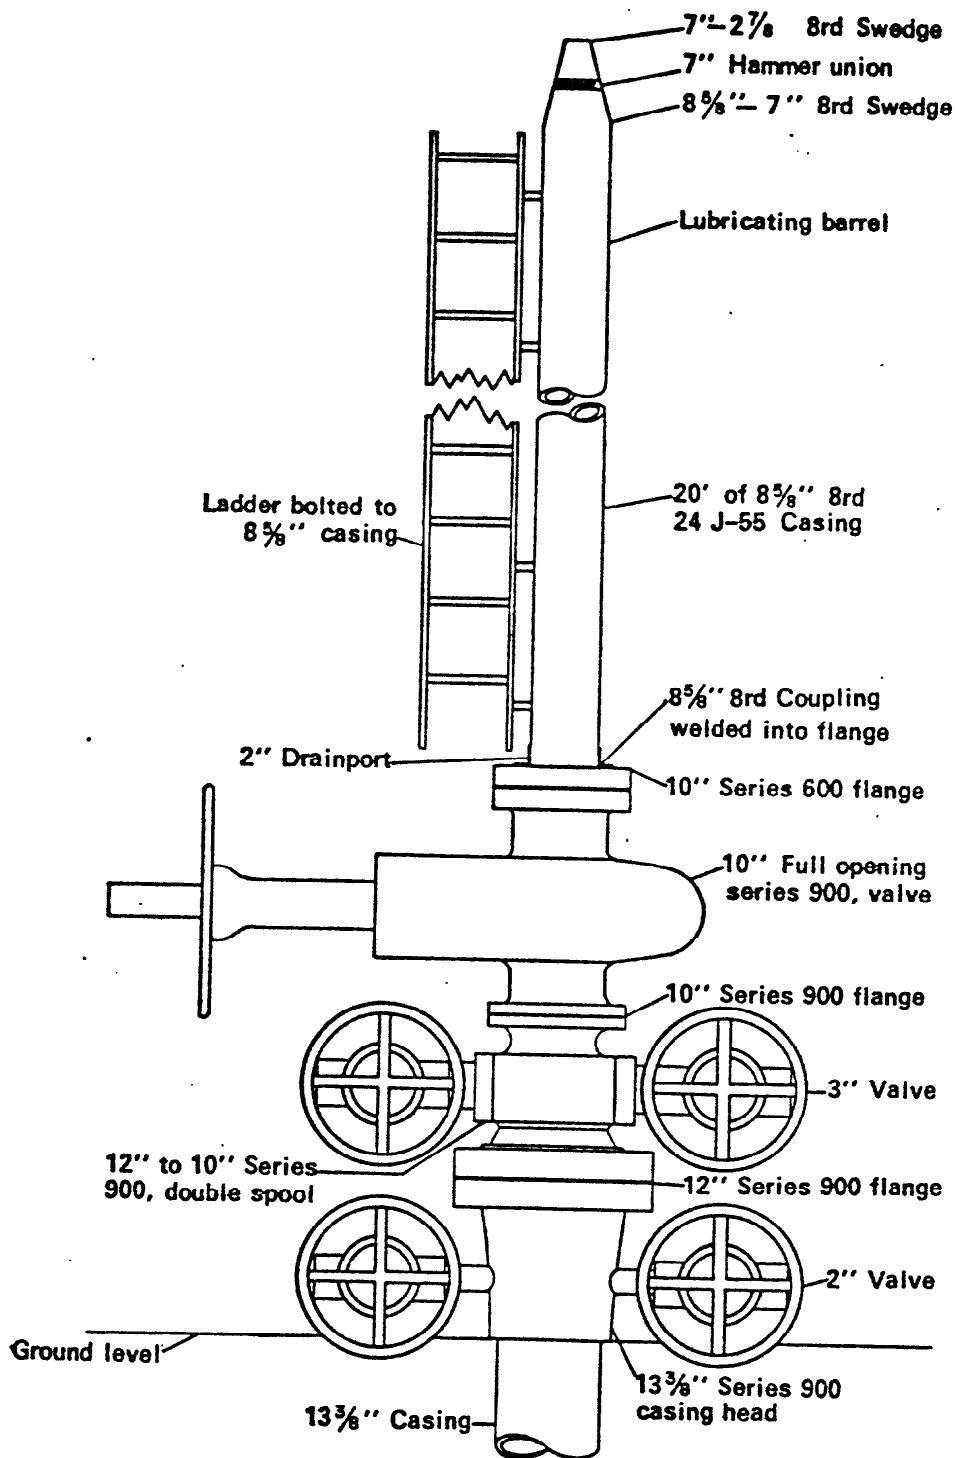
Well-head equipment of Madison test well no. 1, with lubricating barrel attached.
